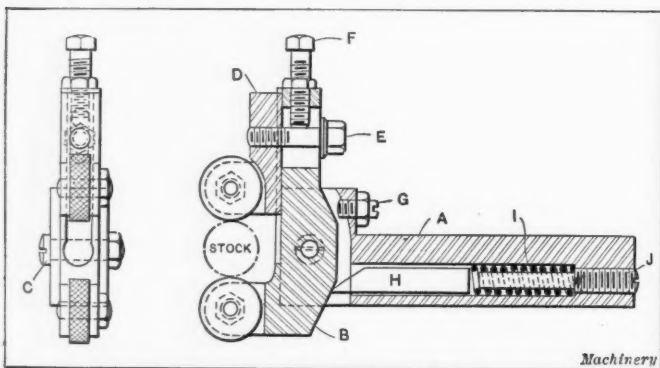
Double Knurl-holder of the Adjustable Type for Use on the Top- or Side-working Tool-slides
